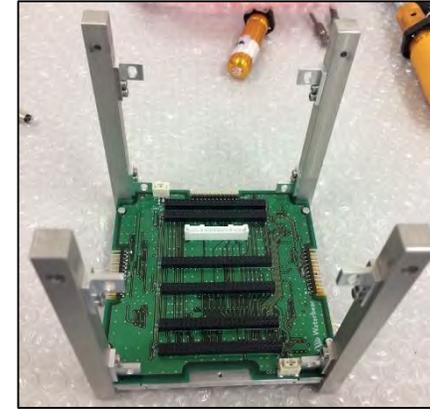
(above): (STEP-4) Attaching the magnets on rails and all the boards including battery box
